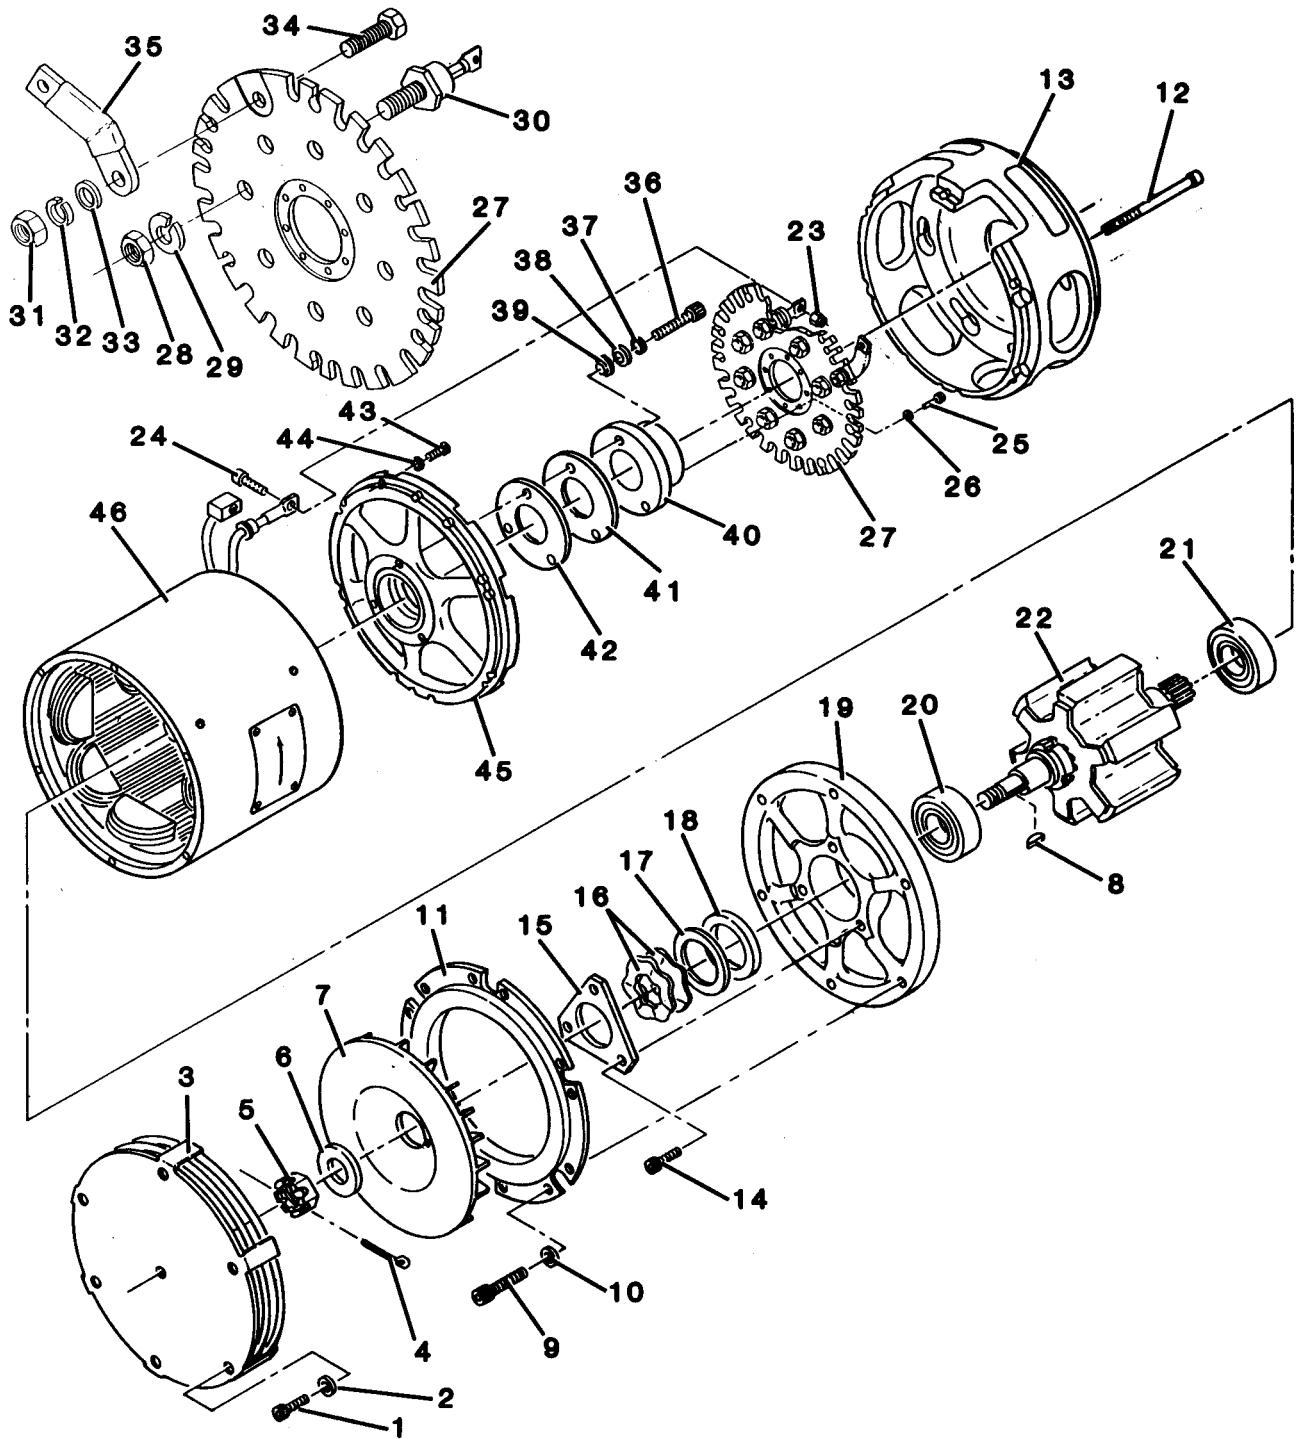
10kW Generator Assembly (Sheet 1 of 2)
